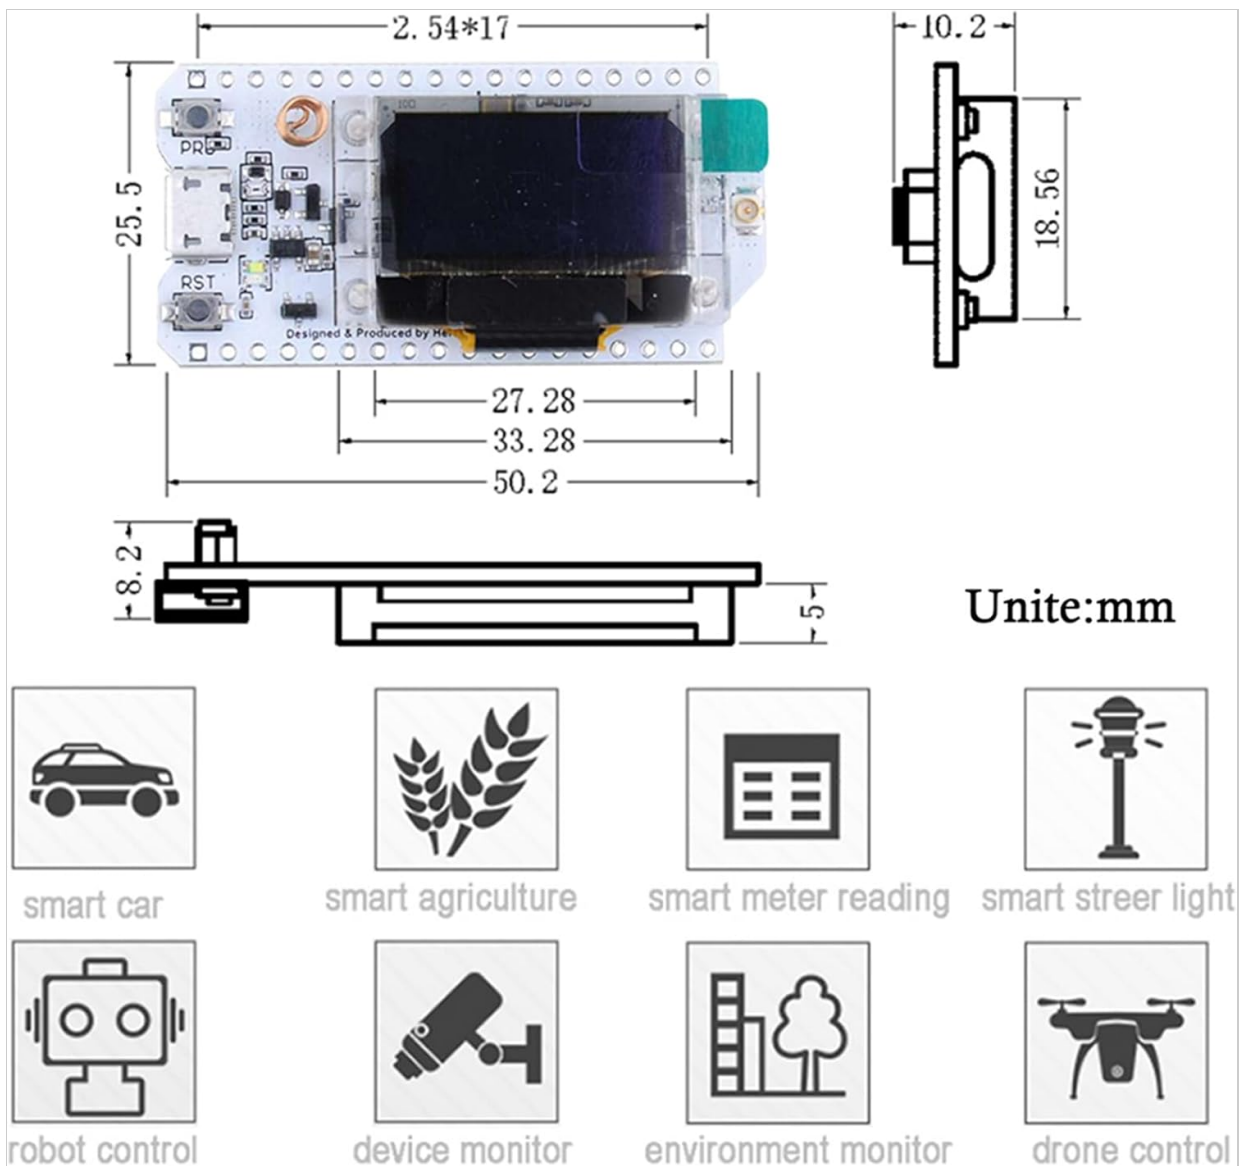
Dimensional drawing of the ESP32 Lora V3 development board in millimeters.
